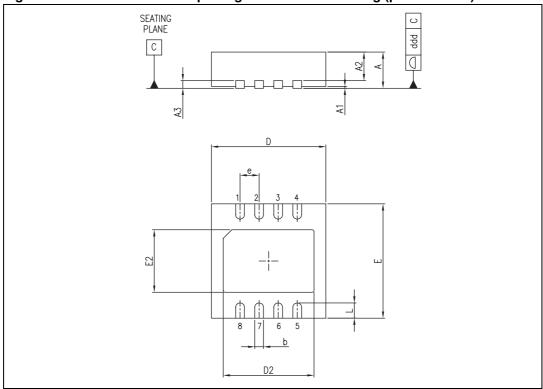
DFN8 3x3x1.0 mm package mechanical drawing (pitch 0.5 mm)
